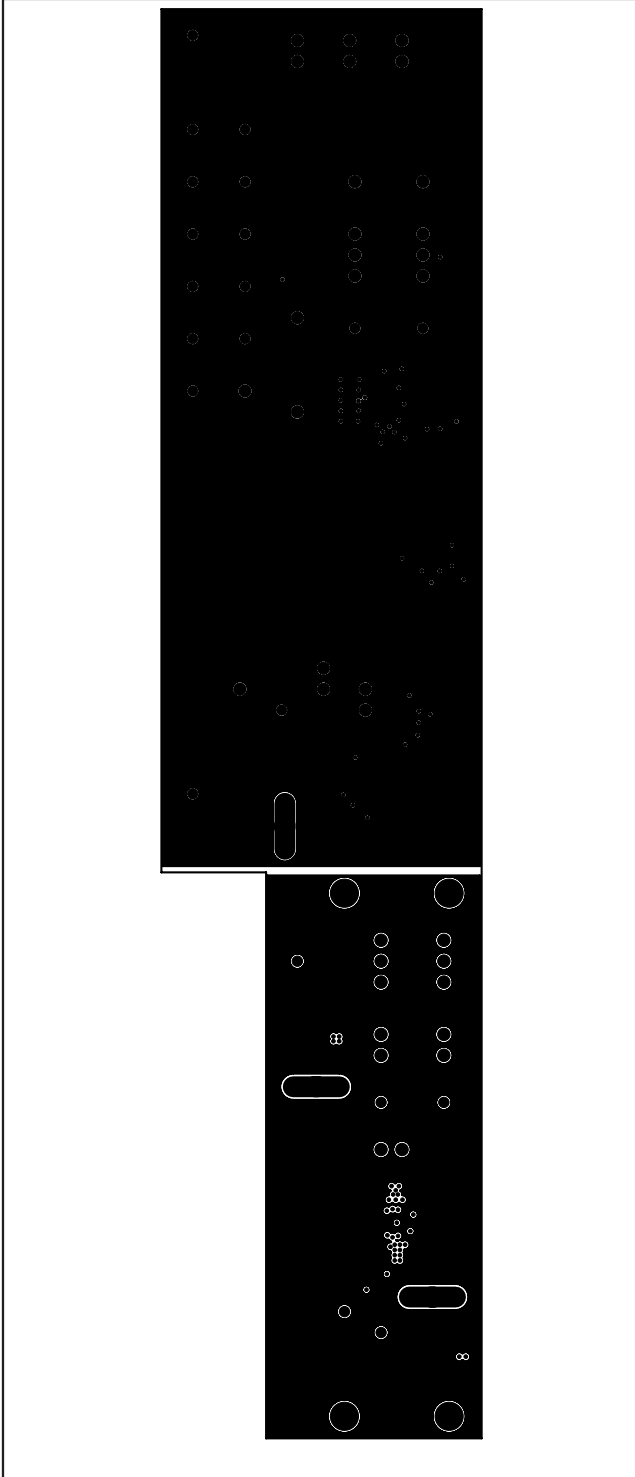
MAX3975 EV Kit PCB Layout—Ground Plane
